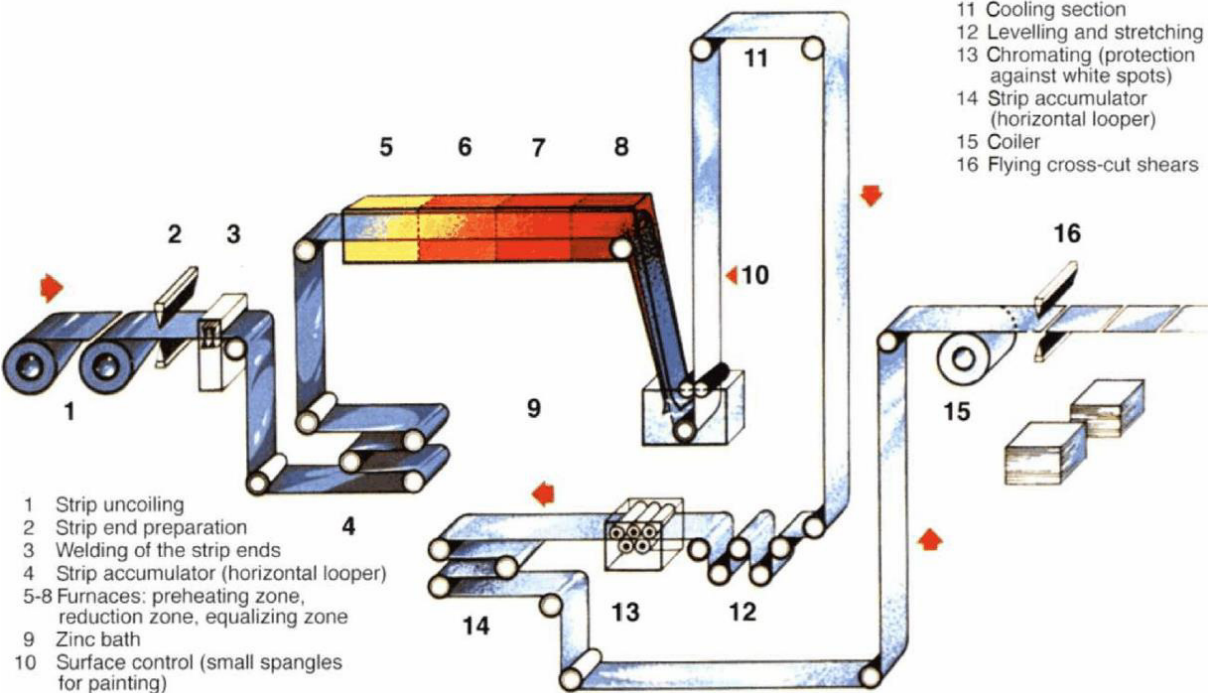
Layout of a continuous hot-dip galvanizing line. [11]
